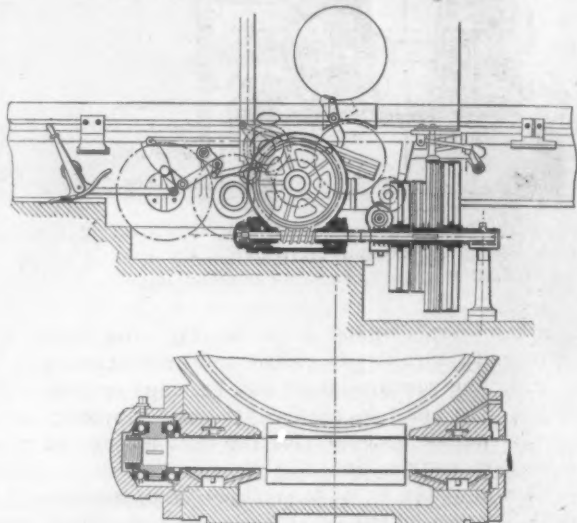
Ball Bearings for a Heavy Worm Driven 144-In. Planer.
